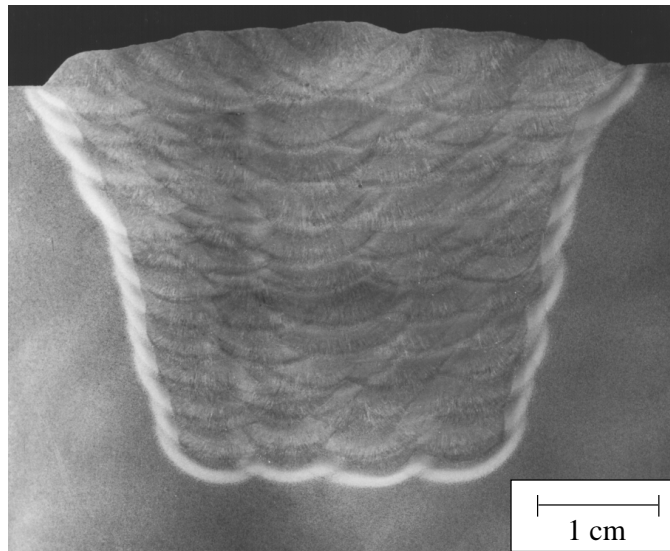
The macrostructure of a multirun weld, made by sequentially depositing a number of beads [151].
